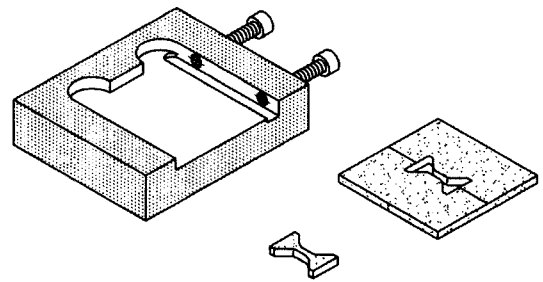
Schematic diagram of mold and device to fabricate the specimen.
